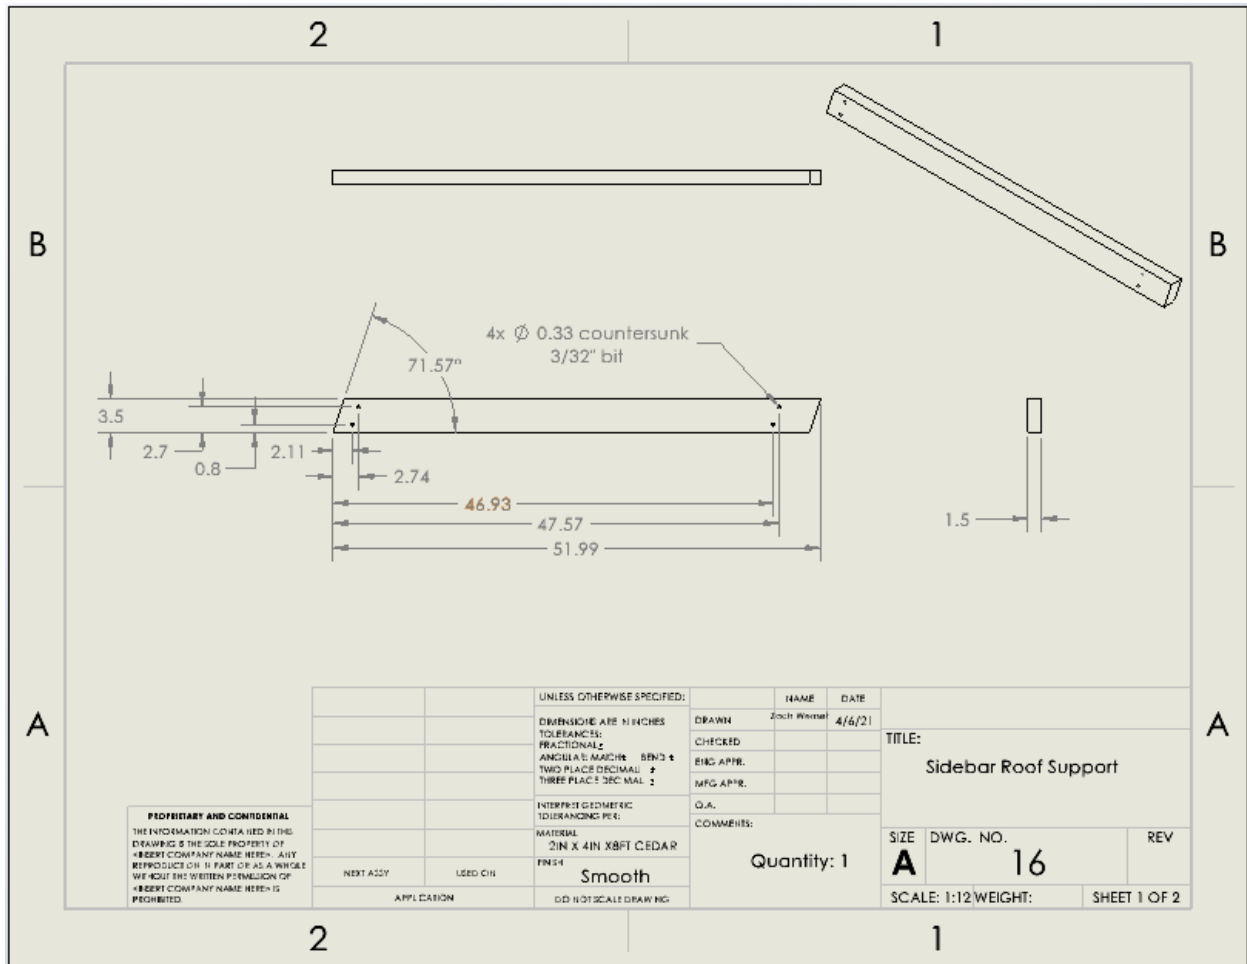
Engineering Drawing of the Sidebar Roof Support.
